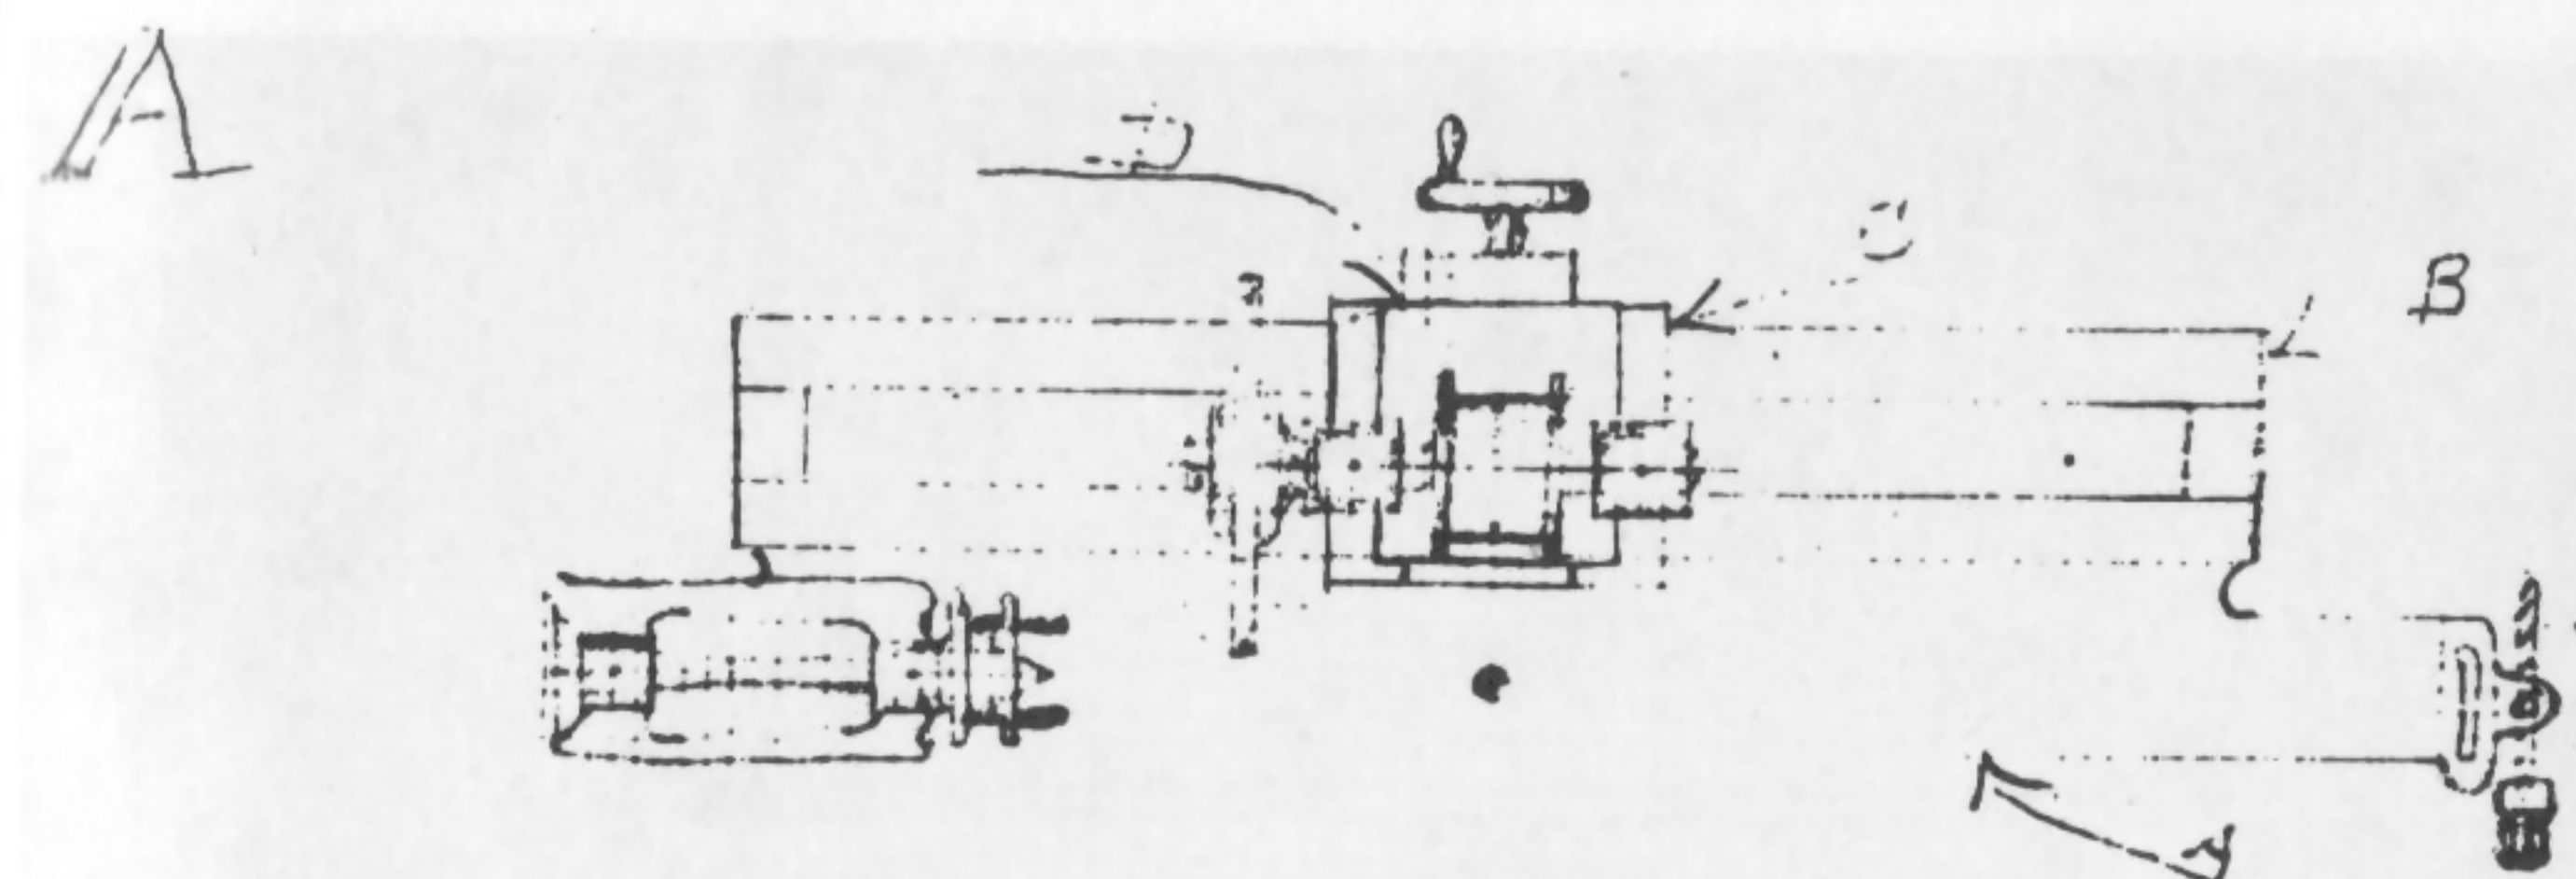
A MOSELEY'S ORIGINAL WATCHMAKING GRINDING MACHINE OF 1860
